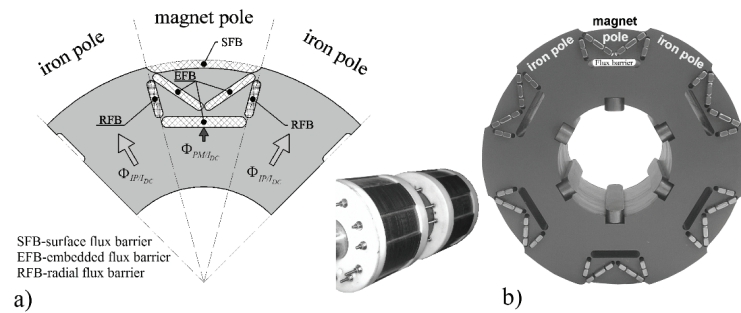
A sketch of the rotor magnetic structure (a) and the assembled rotor (b)
